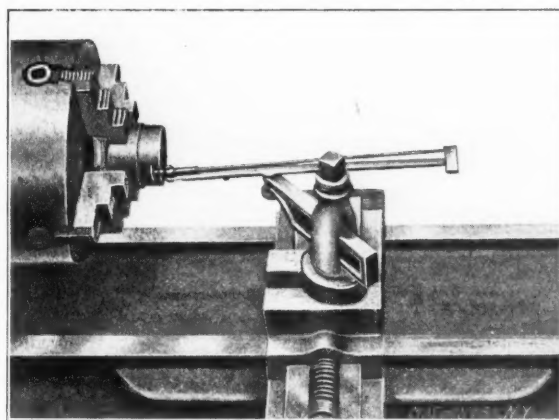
The Indicator in use Truing the Outer Surface of Work Held in a Chuck.
